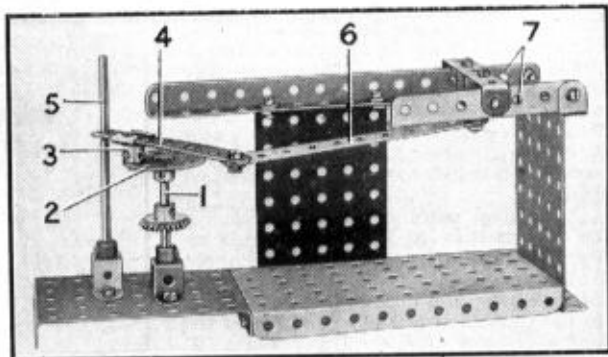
A quick-return mechanism that has uses in model machine tools.
